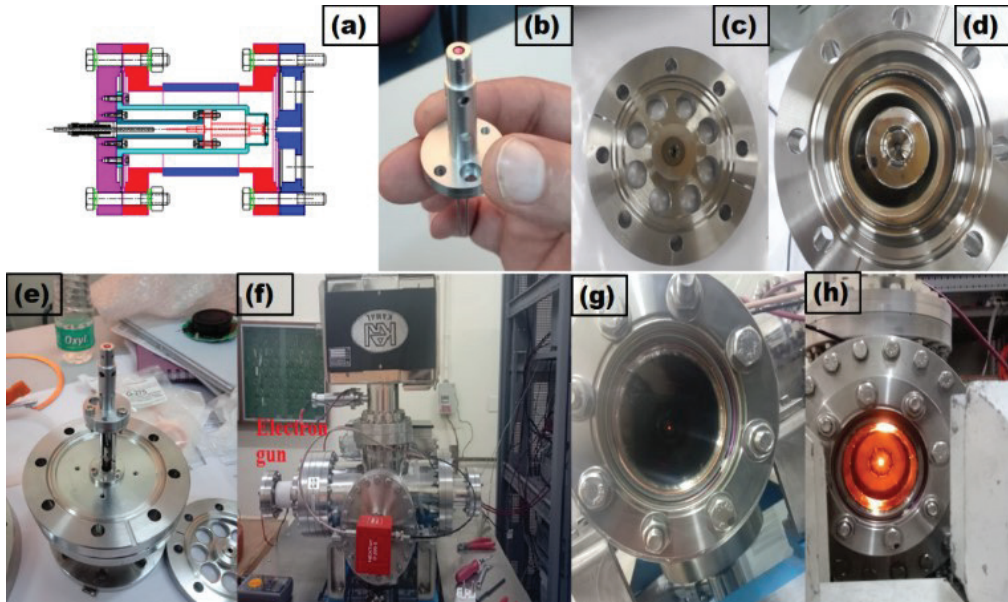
(a) Fabrication drawing of electron gun components, (b) single crystal LaB_6 cathode with heater assembly, (c) Anode flange, (d) Focusing electrode assembly, (e) Cathode assembly (f) Integration of X-band electron gun with test set up, (g) faint glow of cathode at 1200 K, and (h) Bright glow of cathode at 1600 K.
